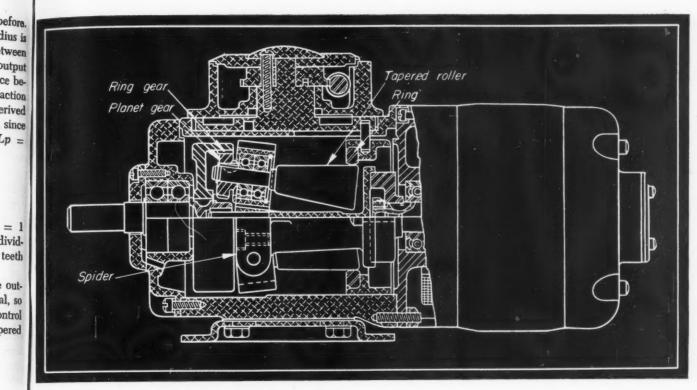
Sectional view of transmission unit showing hinged mounting for rollers and minimum number of bearings
